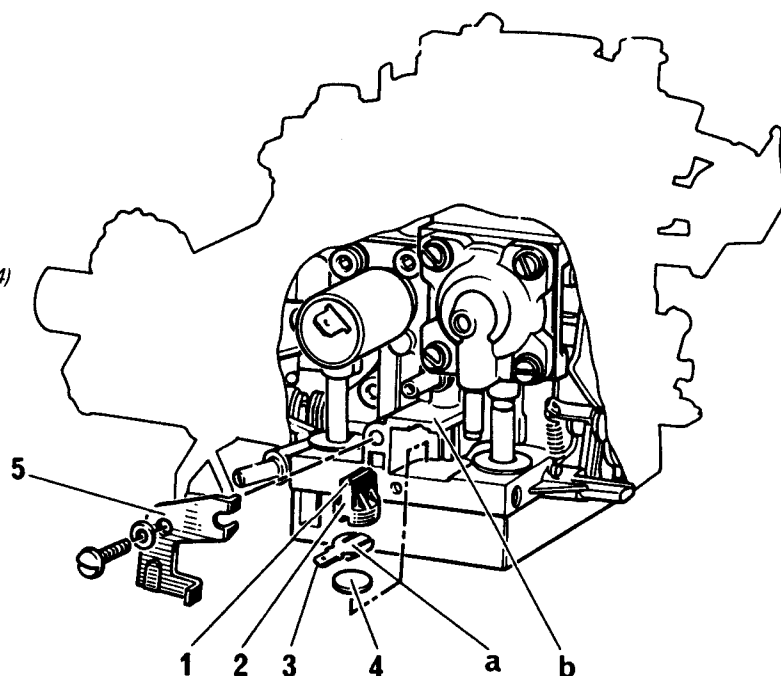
Exploded view of Solex Z1 carburettor (Sec 3)
